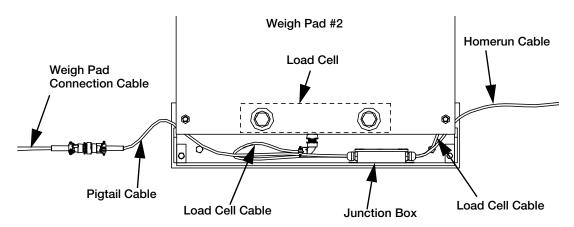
End of Weigh Pad Close-up Cabling Diagram – (Top Plate Has Been Removed For Clarity)
